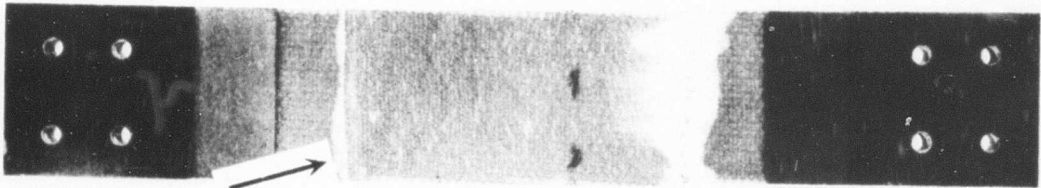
Specimen No. 1, Type IV - Failure of Facing on Mold Side at Edge of Reinforcement.
